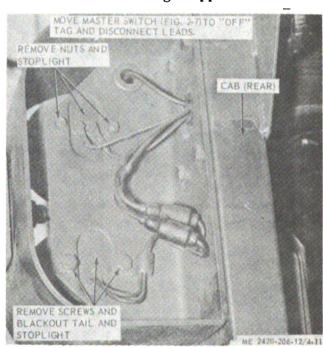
Tail and stoplight, blackout tail and stoplight assembly, removal and installation.
